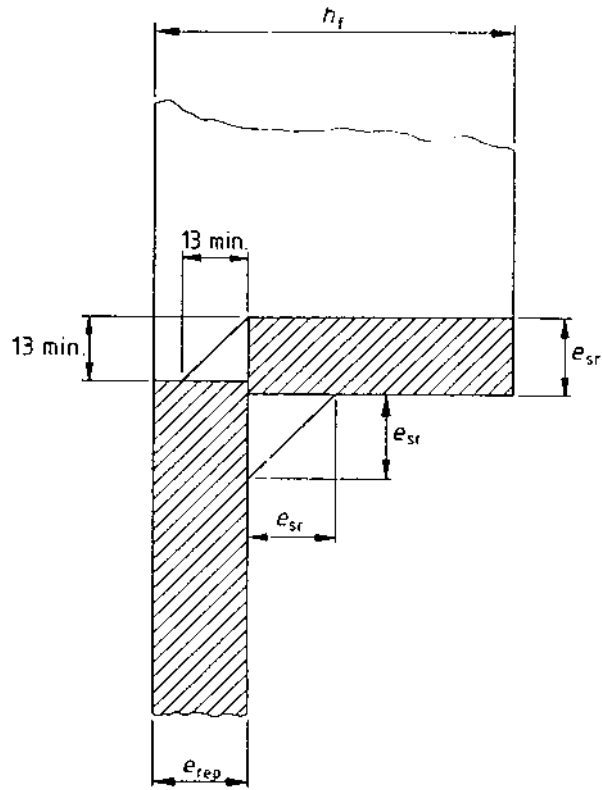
Compensation of welded branch up to one-third of the diameter of the boiler shell
